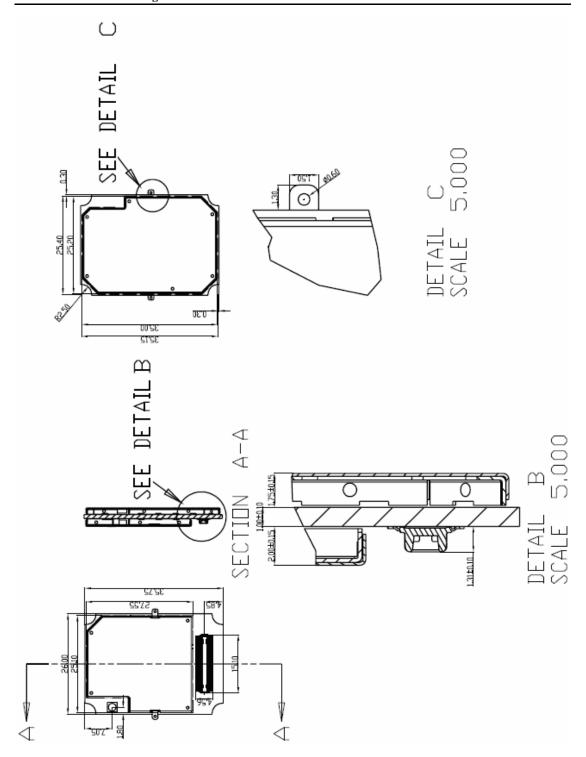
Mechanical dimensions of SIM5215E (Unit: mm)
